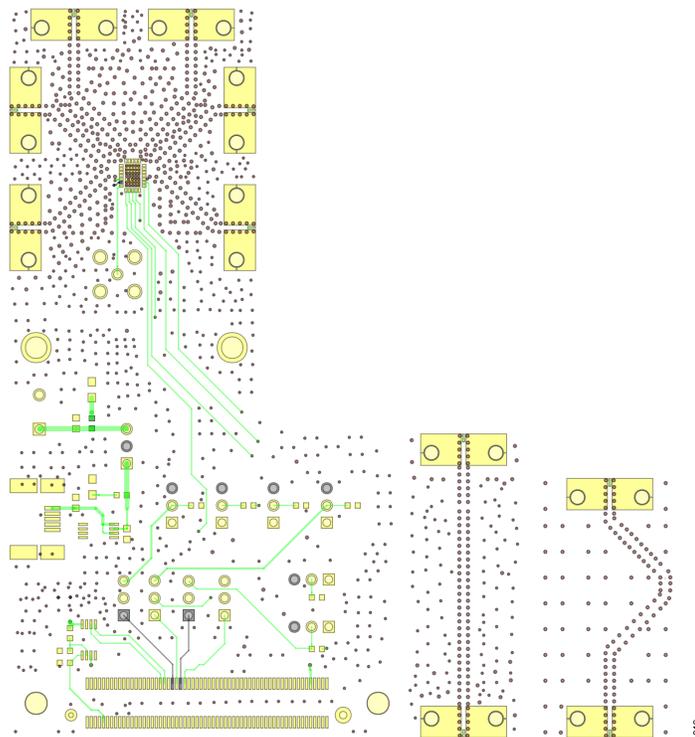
EVAL-ADGM1121SDZ Component Side PCB Drawing (Layer 1)
